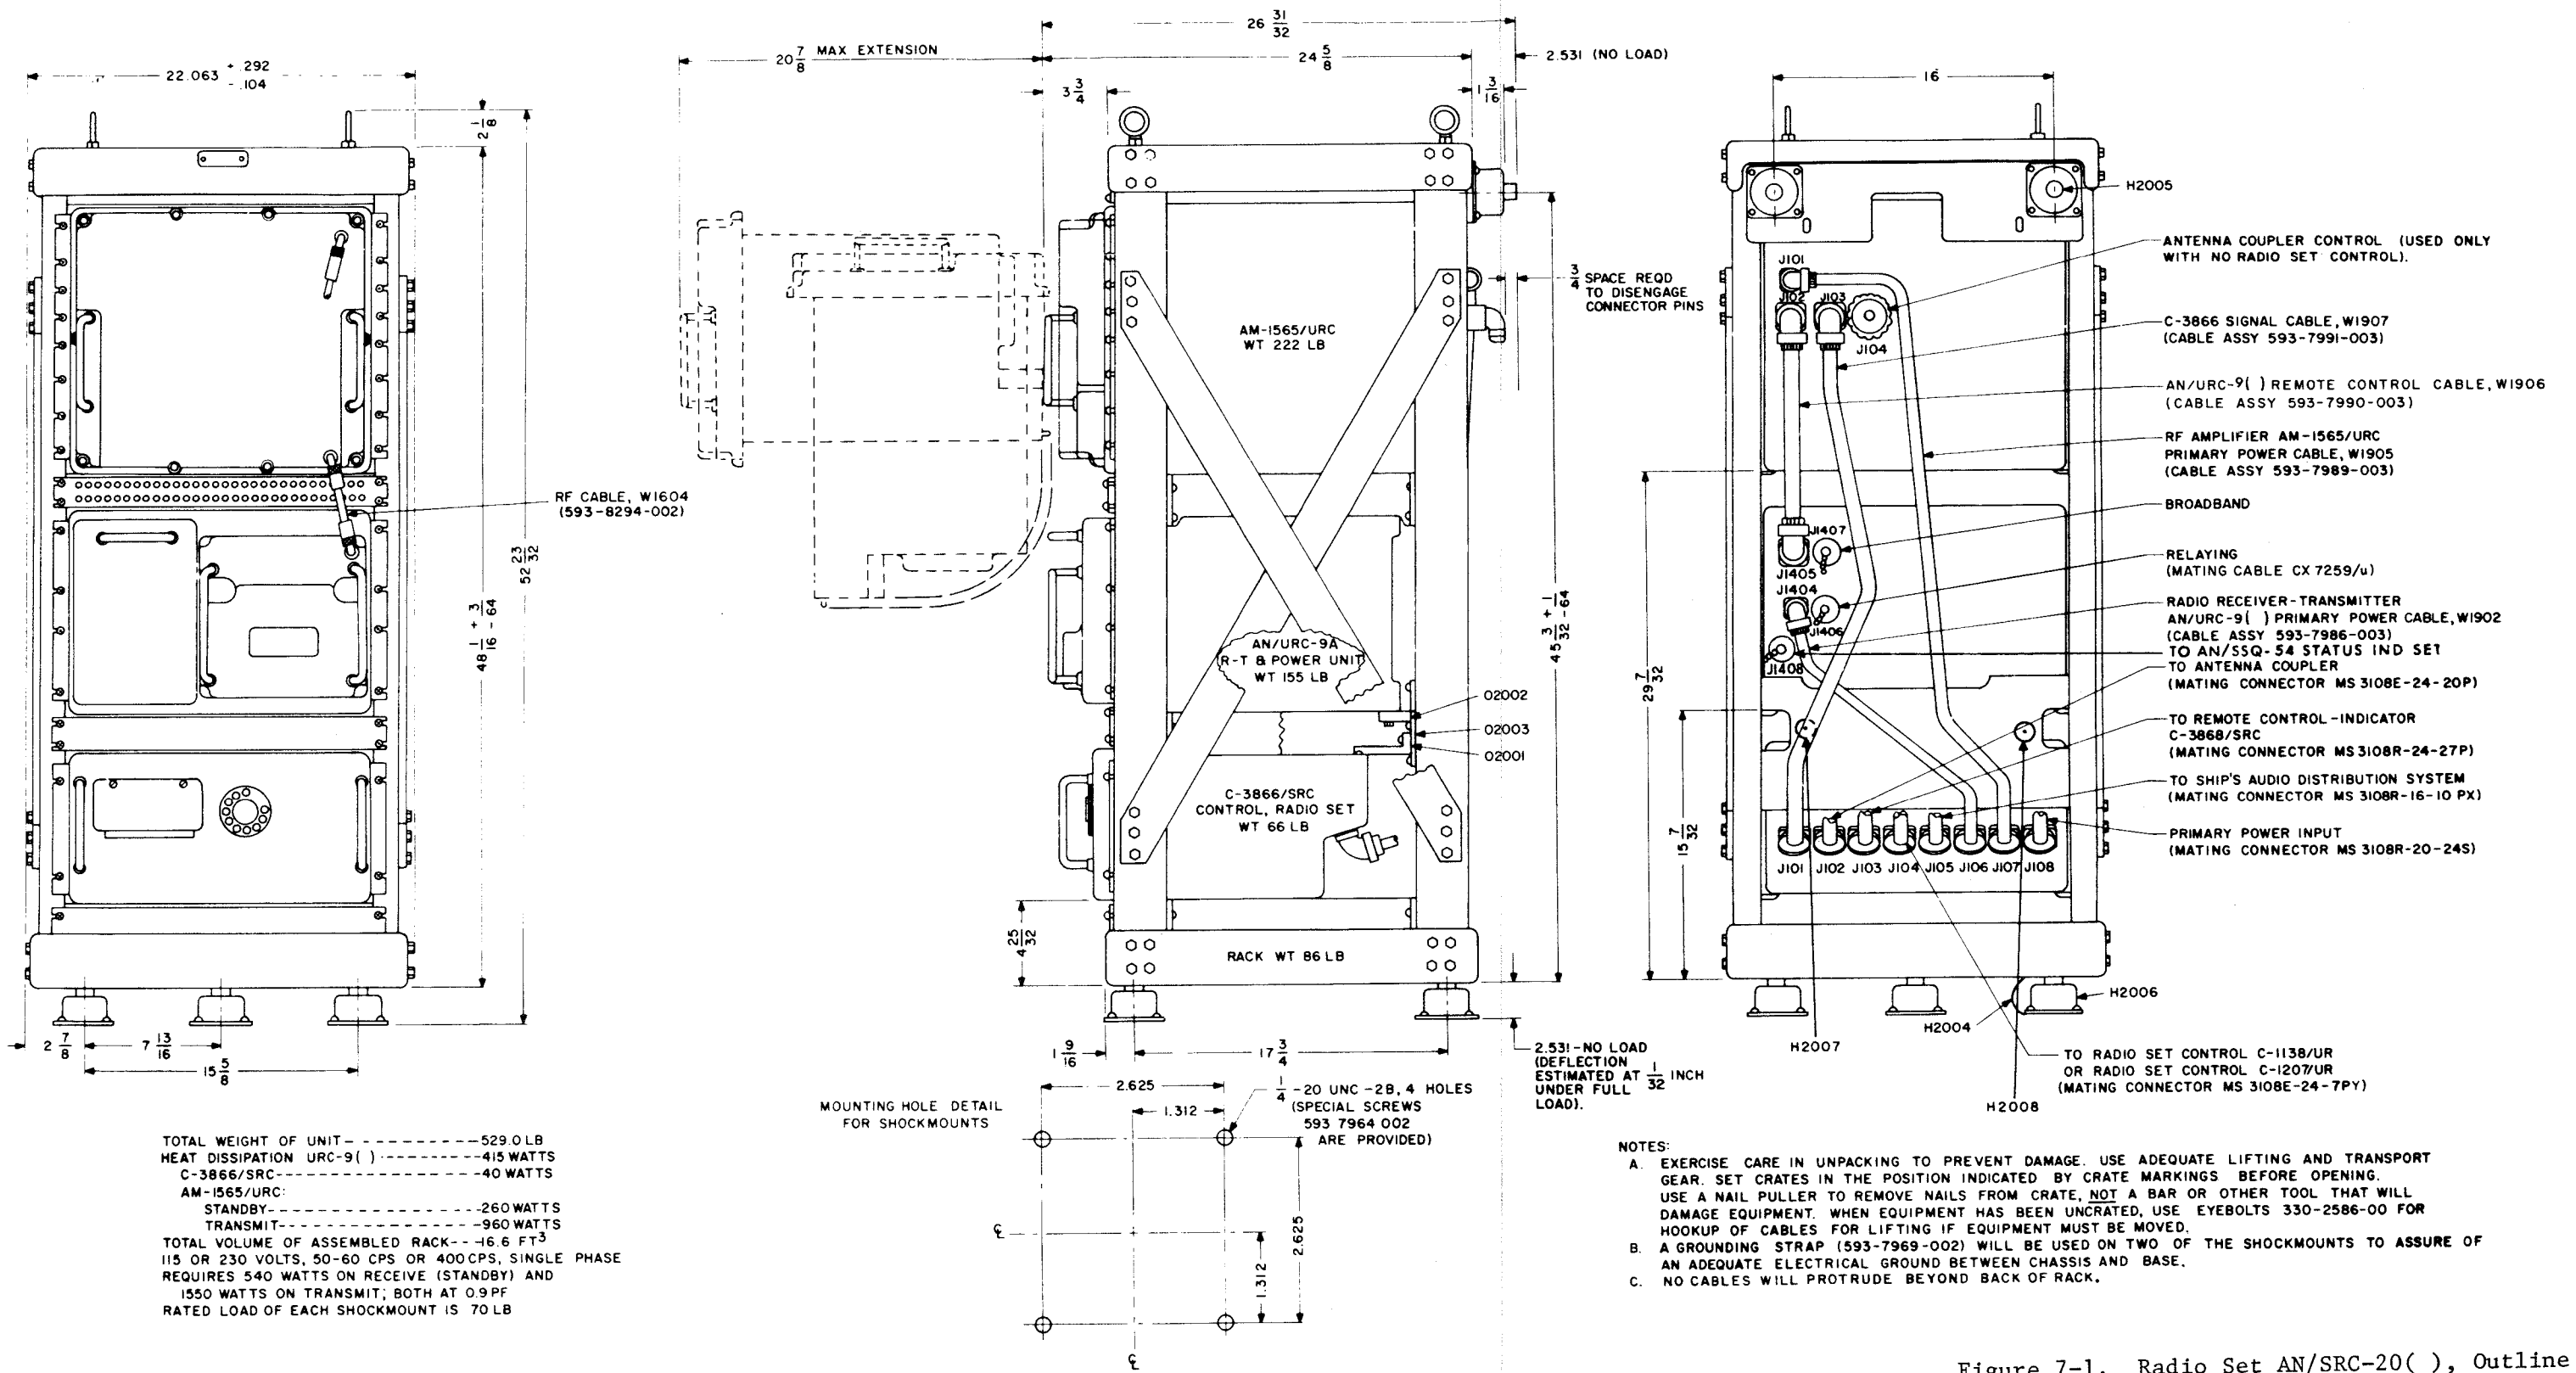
Radio Set AN/SRC-20( ), Outline and Mounting Dimensions
